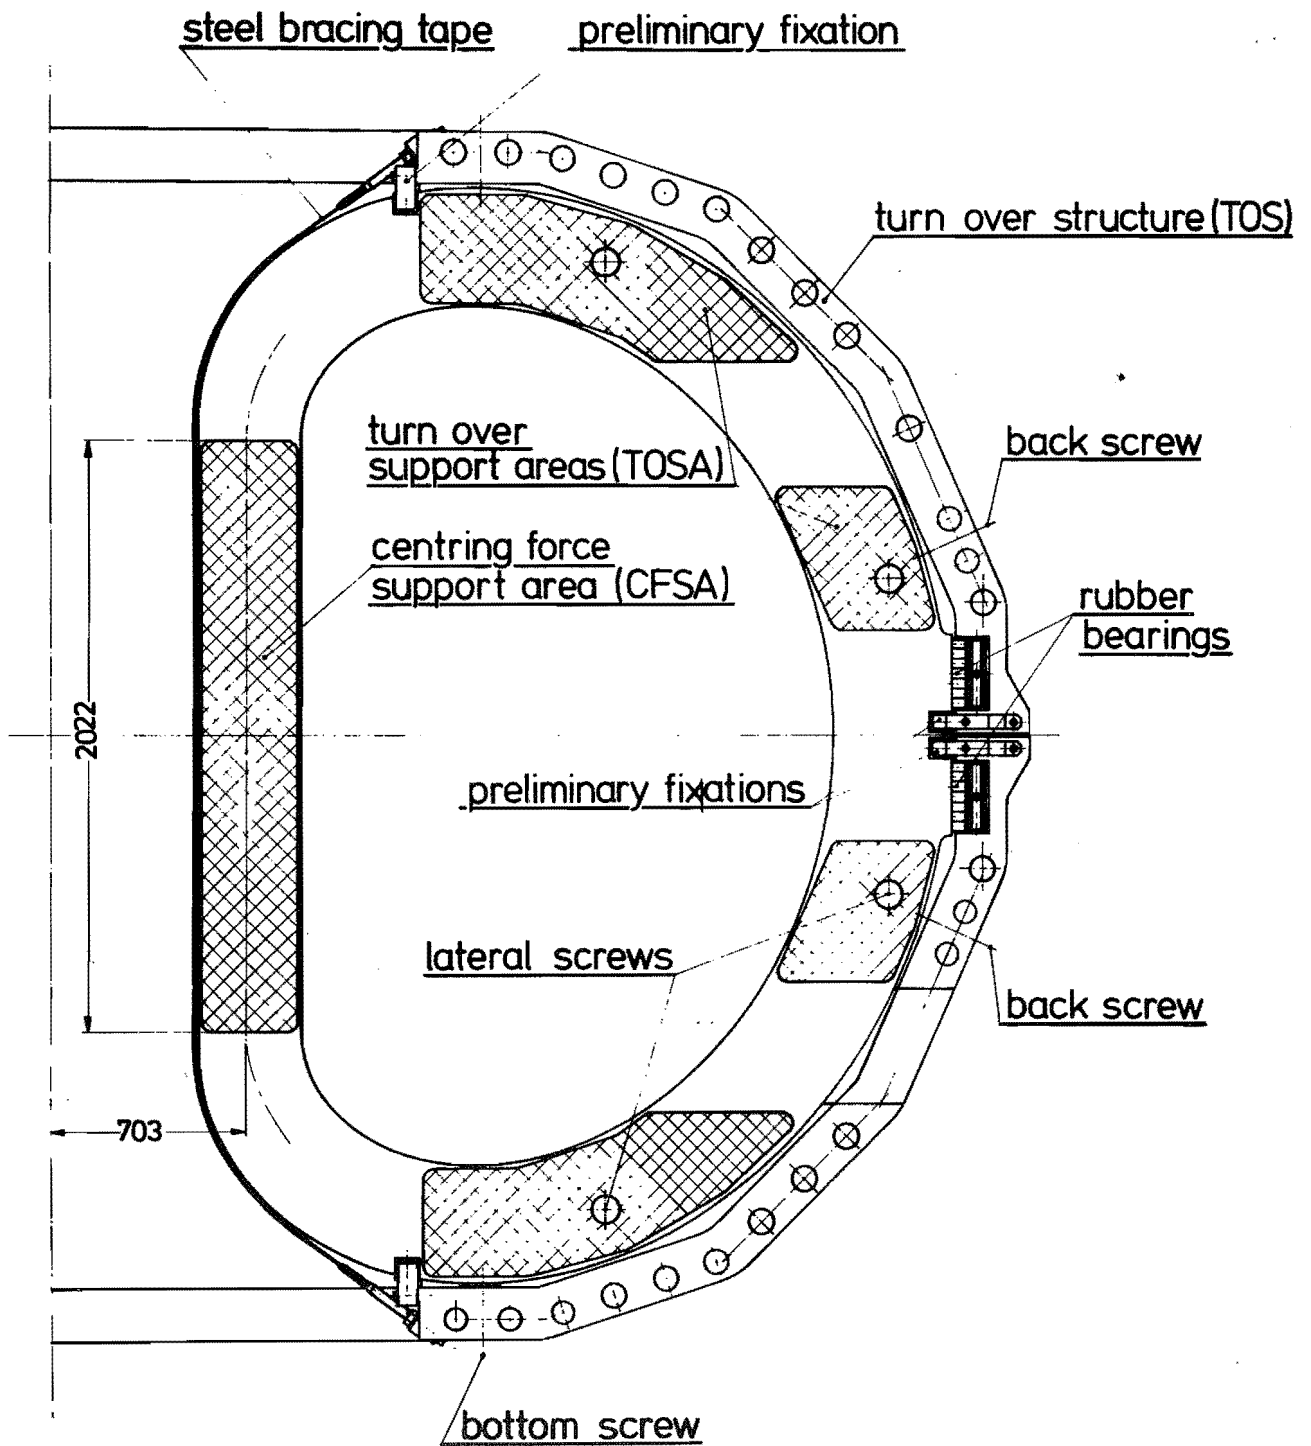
1. 4: Coil support areas and auxiliary assembly fixtures.
